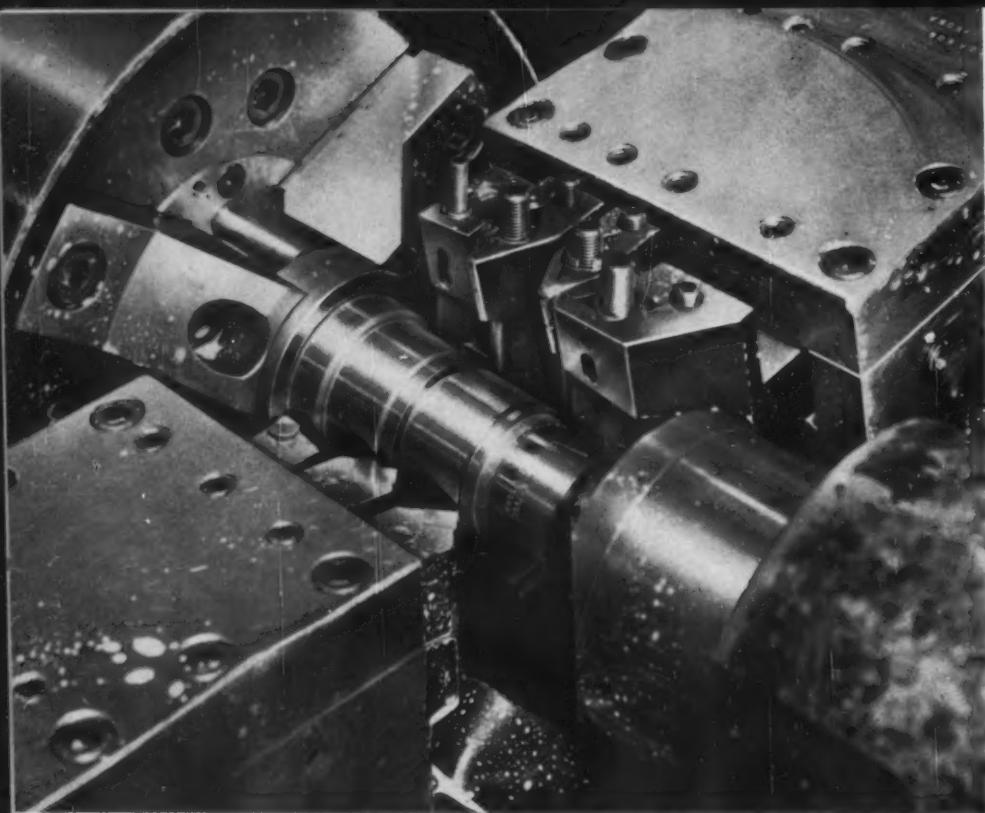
Here, band type on-end insert holders are being used for turning and grooving of an automatic transmission sun gear. They require more side and end clearance.
